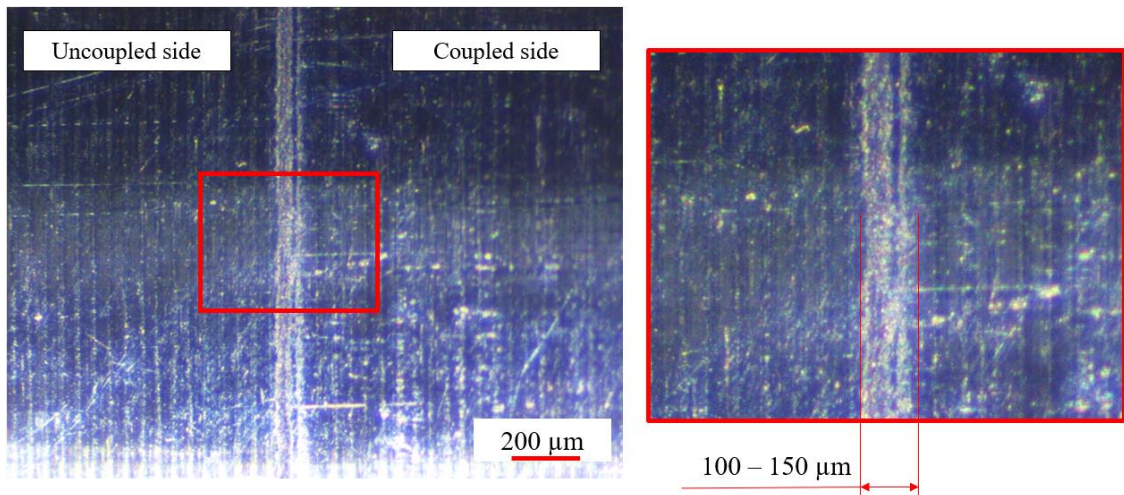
Damaged surfaces of un-failed aluminum sample coupled under 80 MPa pressure
